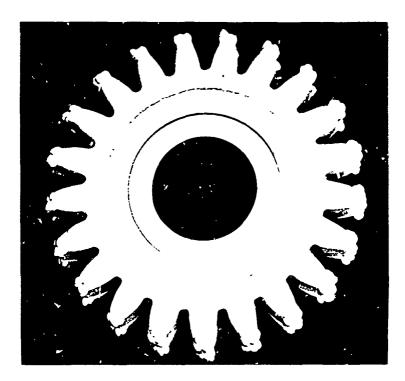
Gear plated in fifth mask (0.015-in. plate thickness).
